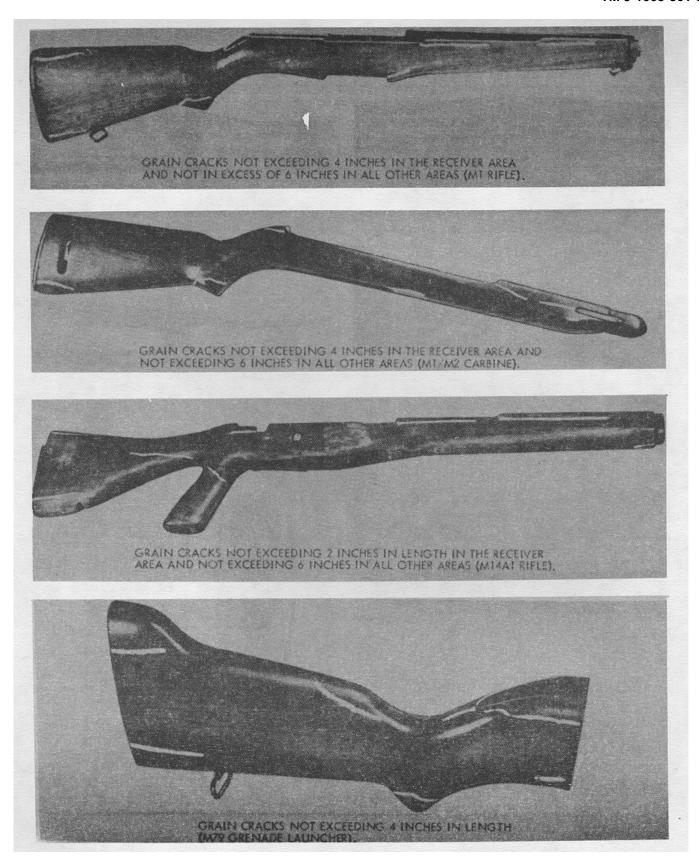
Types of repairable damage to wooden stocks. (2 of 2)
